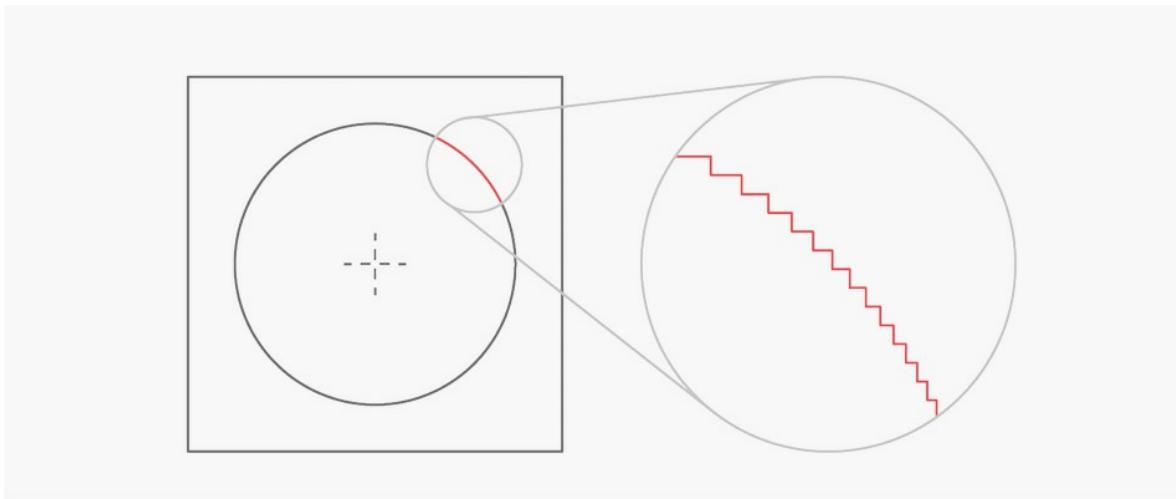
The stepping layer effect becomes more prevalent at the top of horizontal axis holes
